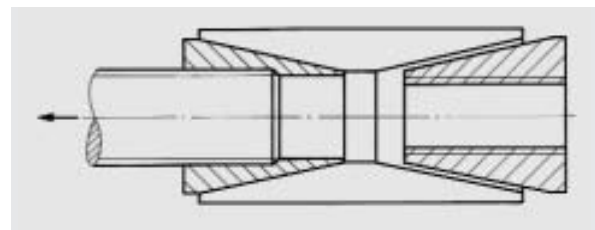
Should the front thrust ring jam, it is released in a similar way. The special marked screws are removed to expose the auxiliary threads of the front thrust ring. The front thrust ring can be released and a Locking Assembly which is located deeply in the hub bore can be removed by corresponding screws.
